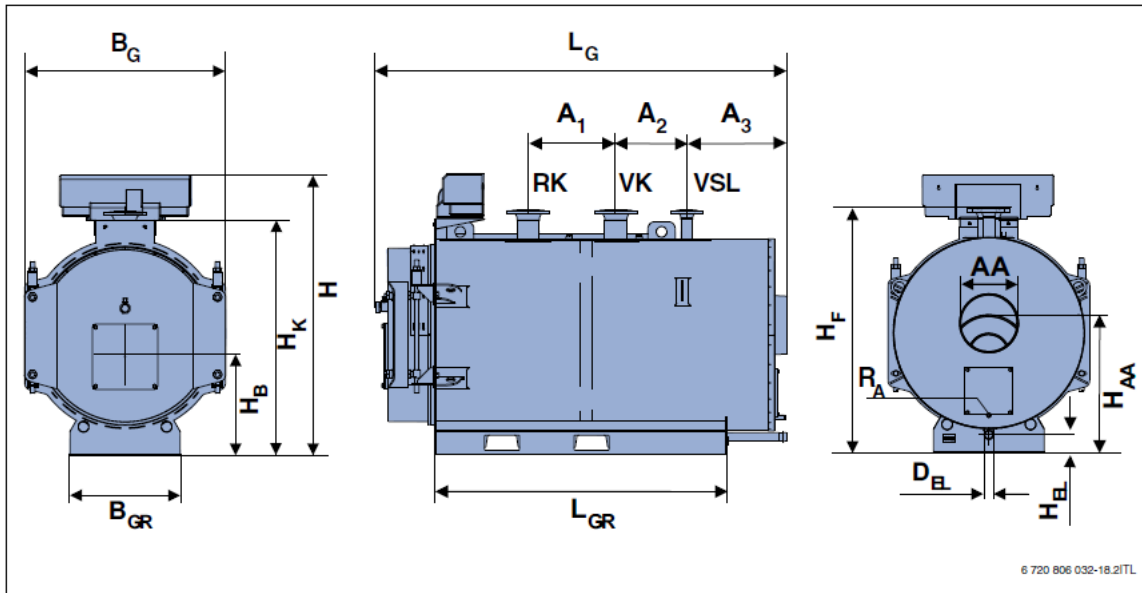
Dimensions Uni 3000F 120kW – 820 kW
